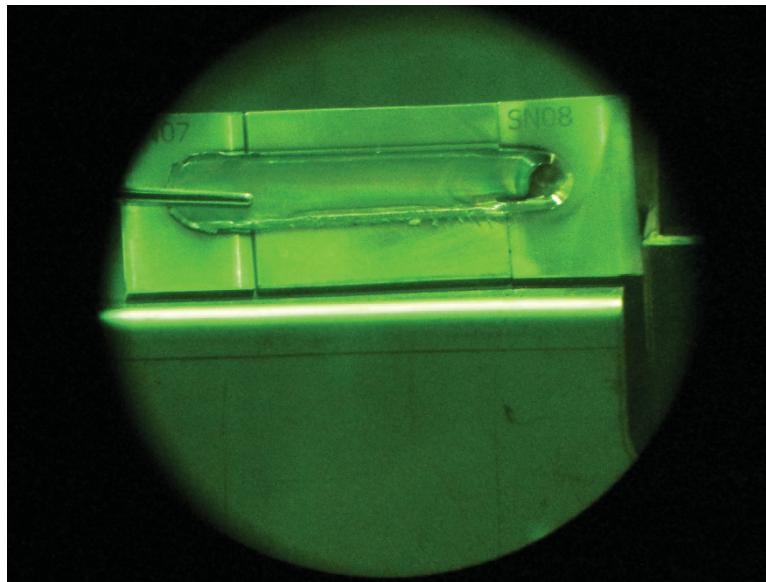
Friction stir weld of the irradiated 304D-5 coupon
